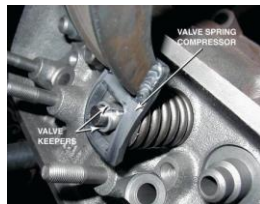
A valve spring compressor is used to compress the valve spring before removing the keepers (locks).
